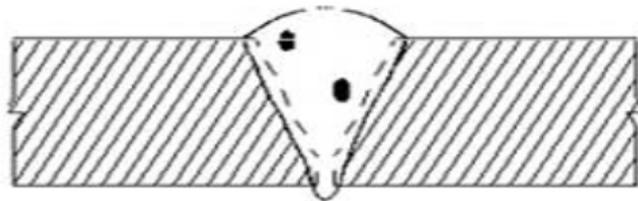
Tungsten inclusion in a welded joint³⁴
